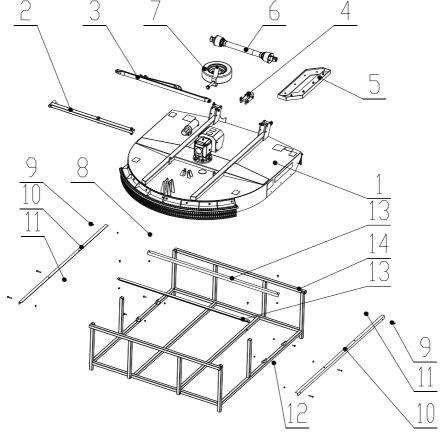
The Pro Rotary cutter and Accessory in Package
